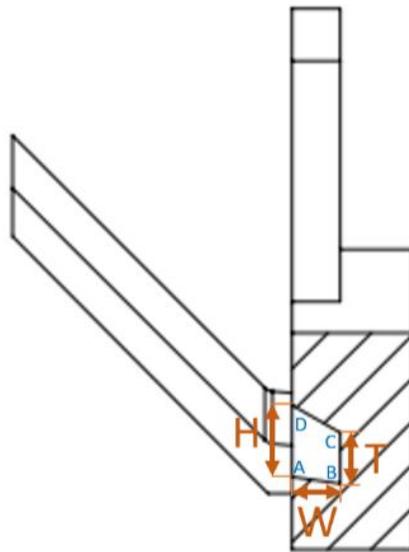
Cross-Sectional View of Linear Dispenser Showing Pathway Dimensions
